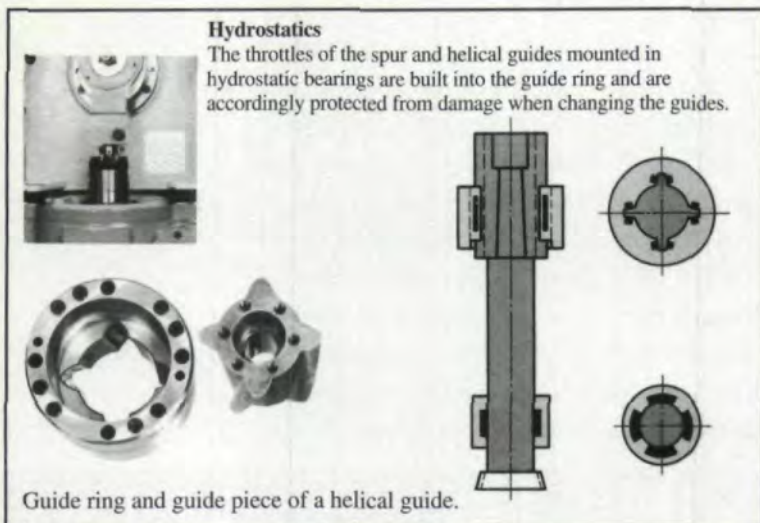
Hydrostatic lubrication of a helical or spur guide and cutter spindle.
